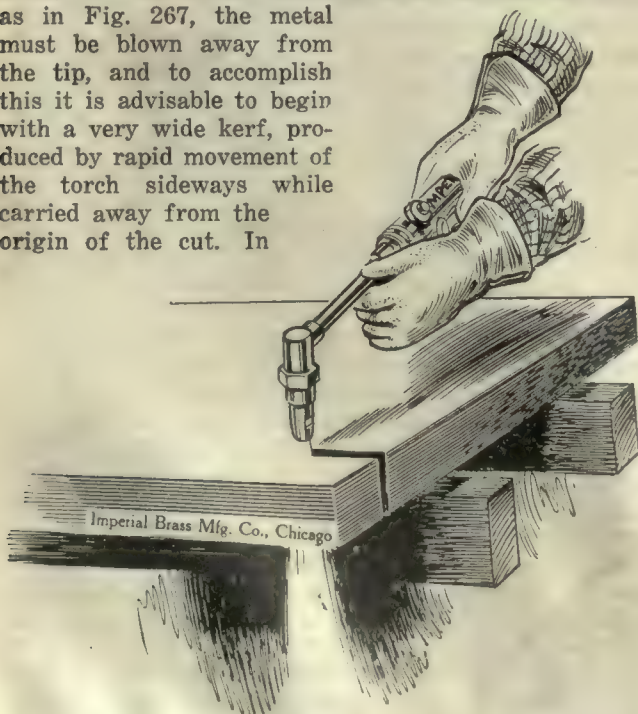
MAKING A CLEAN CUT THROUGH A PLATE
